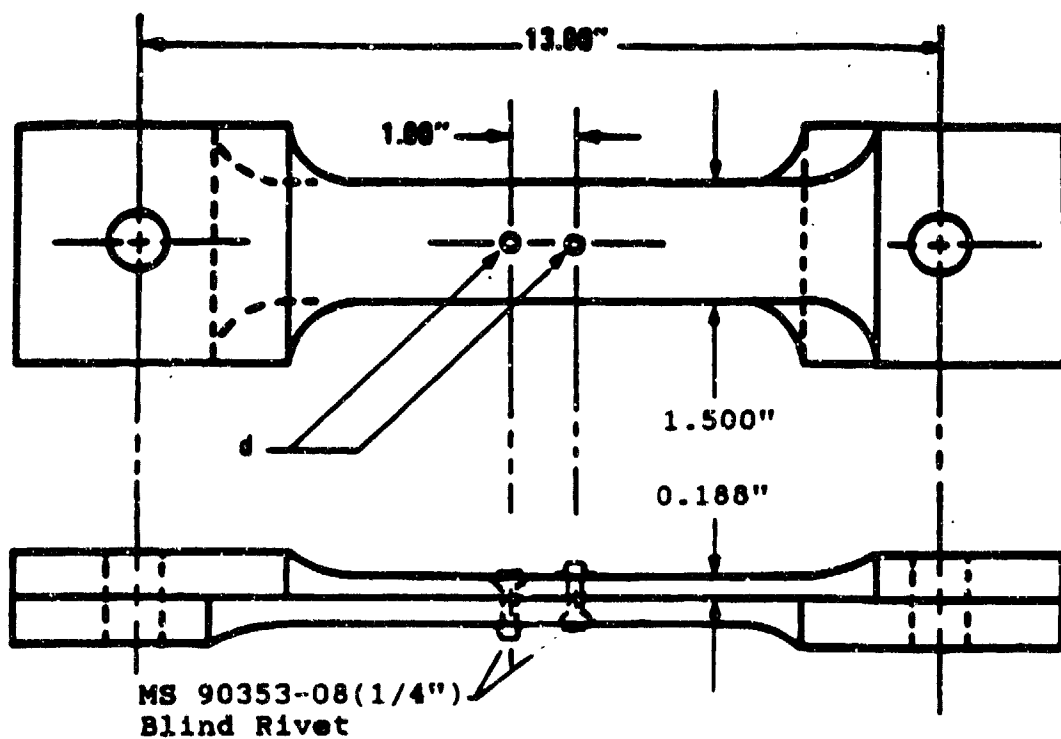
Double-Reversed Dog-Bone Specimen Design with Blind Countersunk Rivets.
